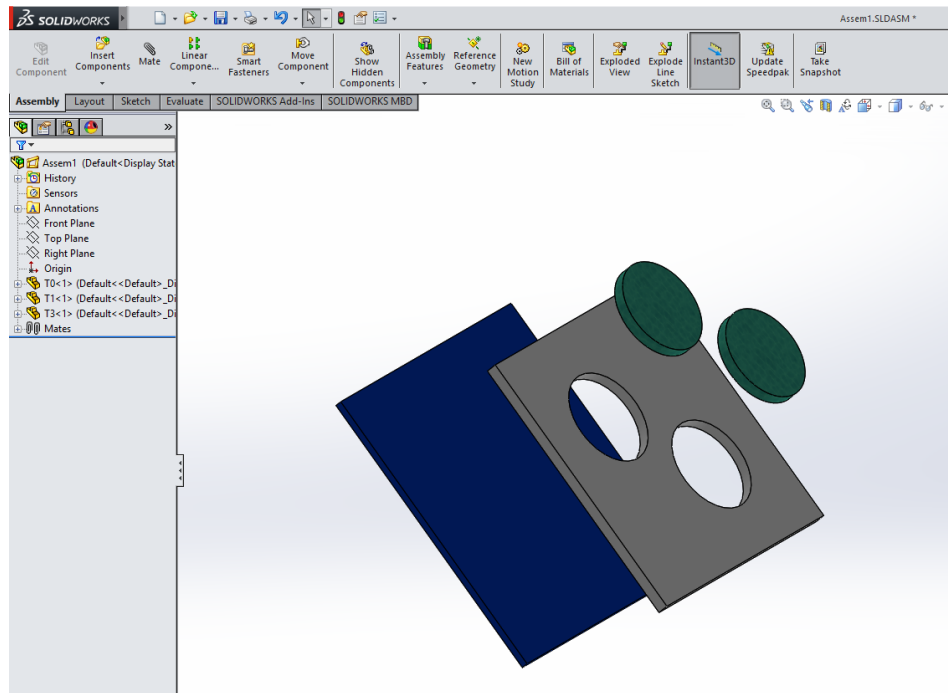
An exploded view of an assembly in Solidworks 2015
